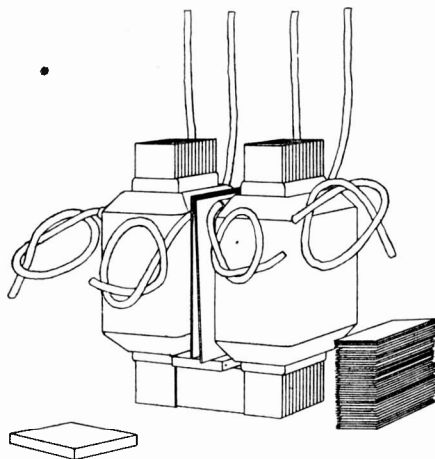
Both Transformer Coils in Position, Showing Laminated Strips Which Form the Upper Yoke of Core
